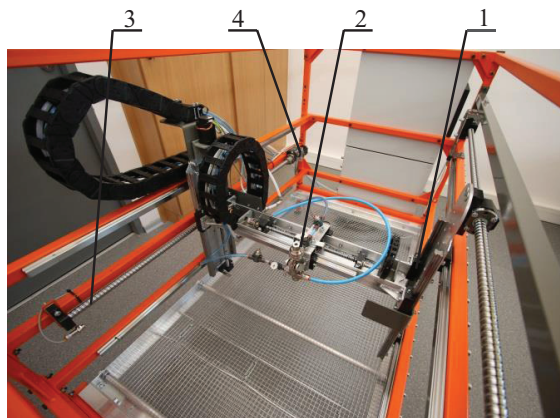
Machine prototype for gluing: 1 – guide, 2 – nozzle, 3 – ball screw drive, 4 – stepper motor.
